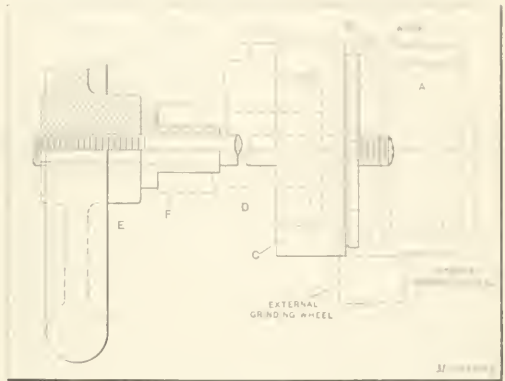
Method of holding Sleeve for grinding Internal and External Diameters at Same Setting
